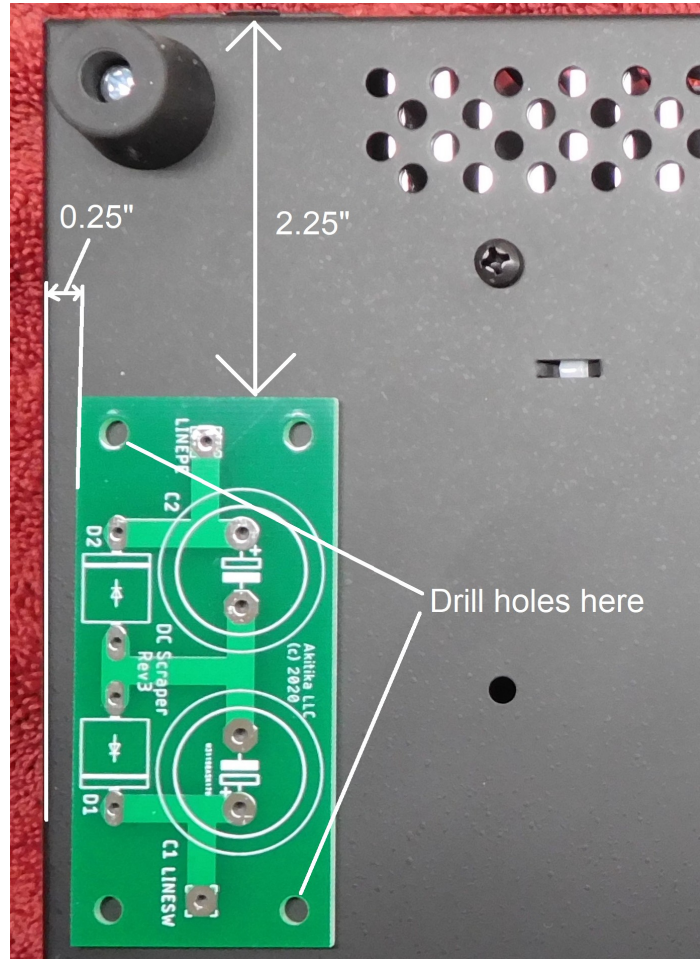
Using the PCB to locate the 2 new mounting holes. New production units will already have these holes drilled.
